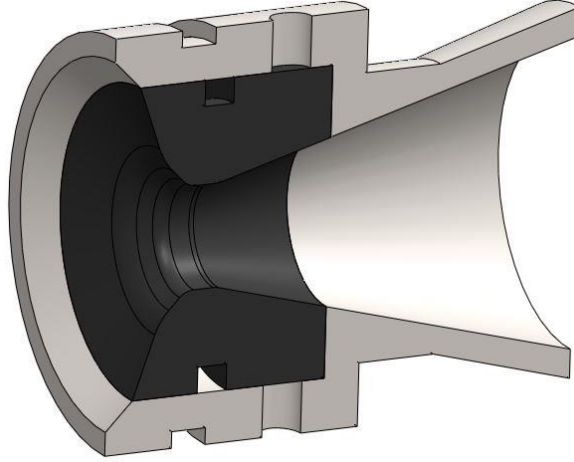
CAD rendering of hybrid motor nozzle assembly.
